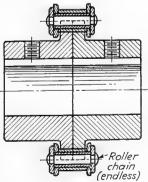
The positive drive design of Diamond Chain & Manufacturing Company consists of two sprockets connected by a length of roller chain. Clearance between sprockets and chain side plates allows freedom to compensate for misalignment in all directions.
